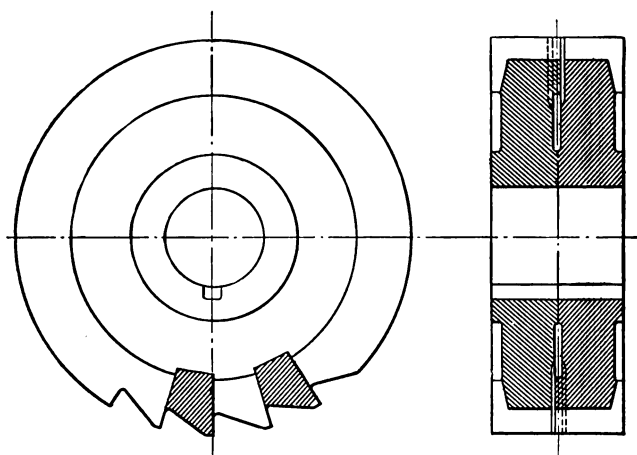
Interlocked Cutters with Every Other Tooth Recessed
